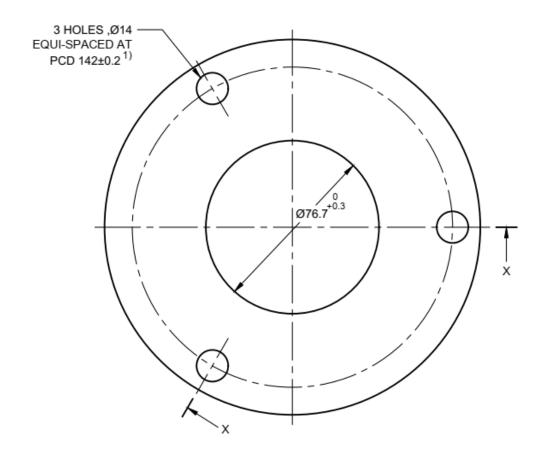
PUMP HEAD PARTS (CONTINUED)
